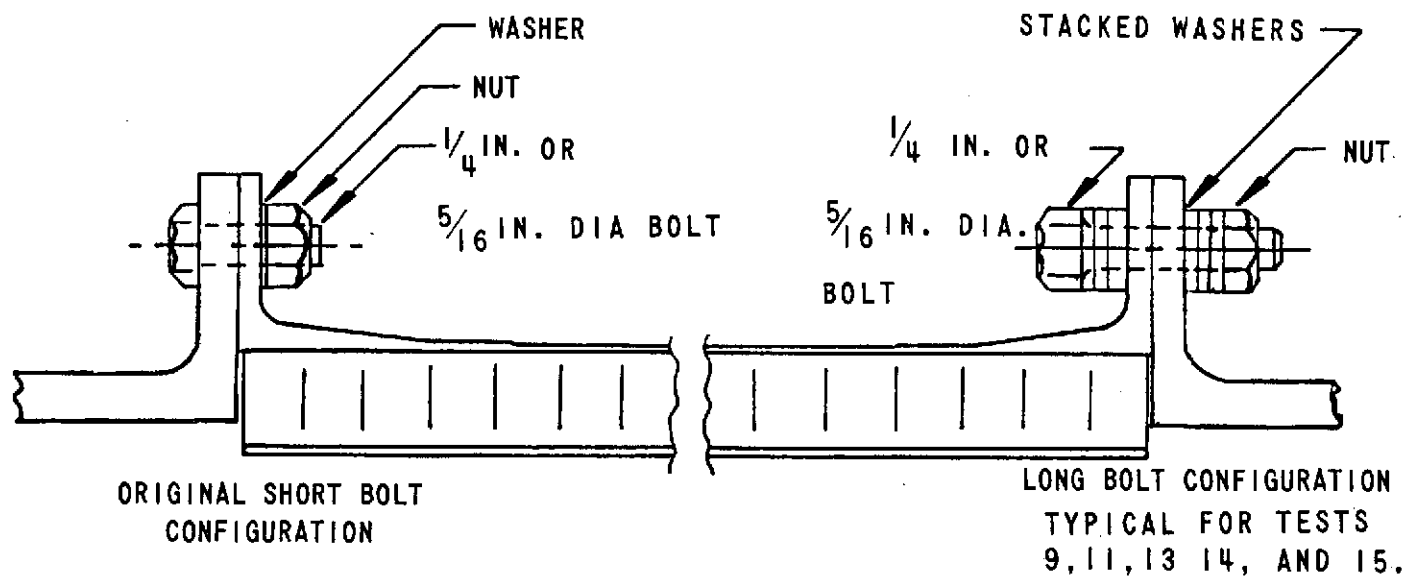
CONFIGURATION OF FLANGE PANEL ATTACHMENT BOLTS
